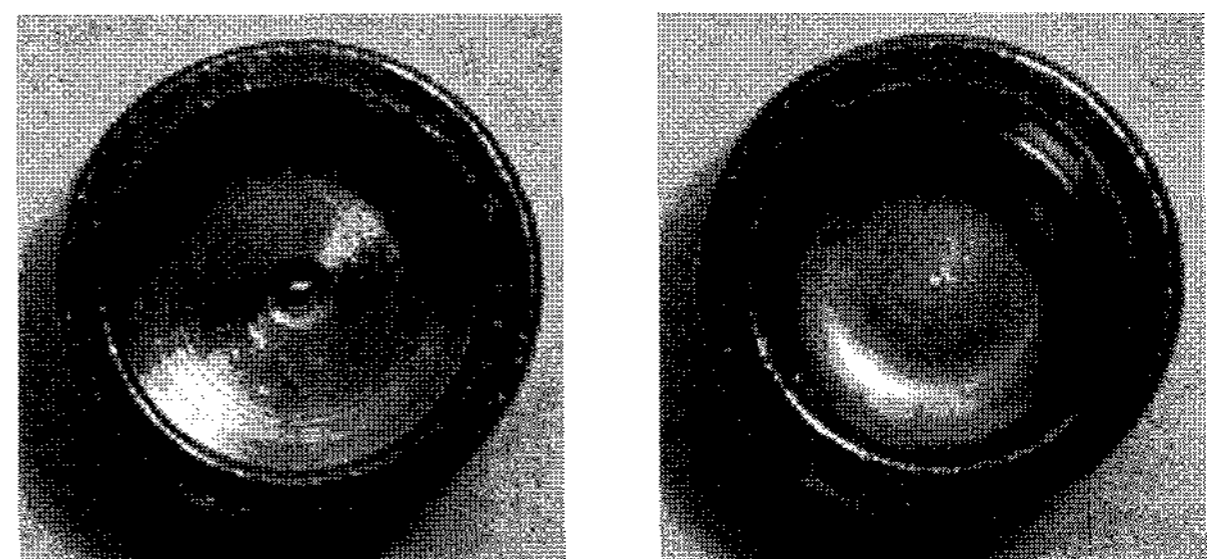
The cross-sectional view of metal tool used in soldering.
